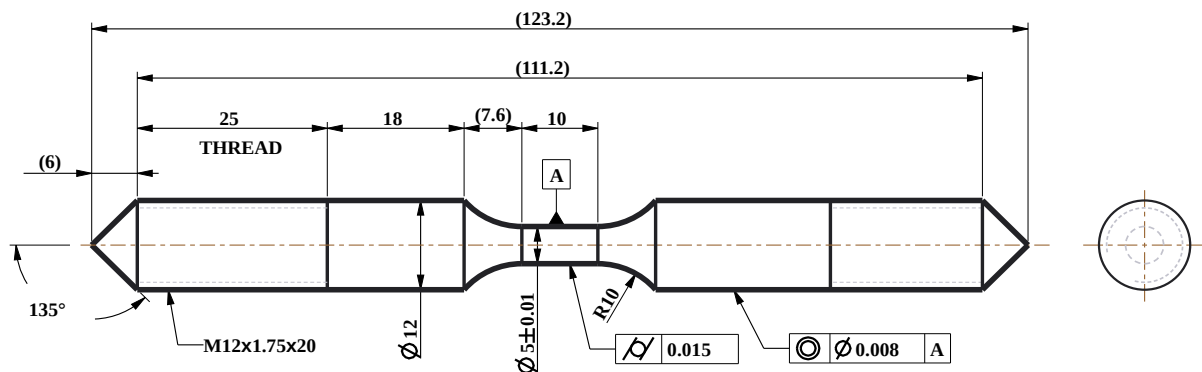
Uniaxial fatigue test samples used for the experimental work (all dimensions given in mm).
